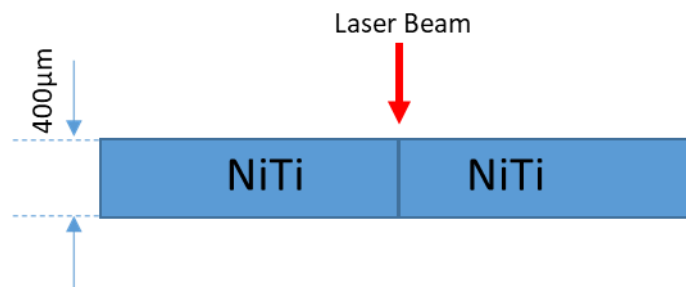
Schematic of the laser welding in a butt joint configuration
